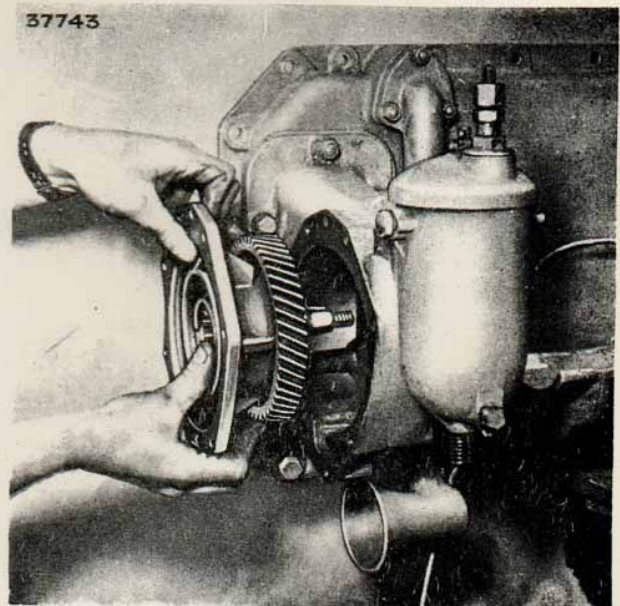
REMOVING COMPRESSOR AND INJECTION PUMP DRIVE GEAR.
